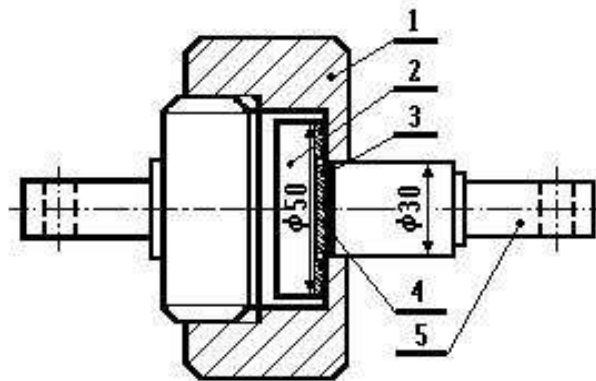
Test piece arrangement for pull-off test [5, 8]: 1 – fixture with holder, 2 – test sample, 3 – coating, 4 – glued bond, 5 – mate
